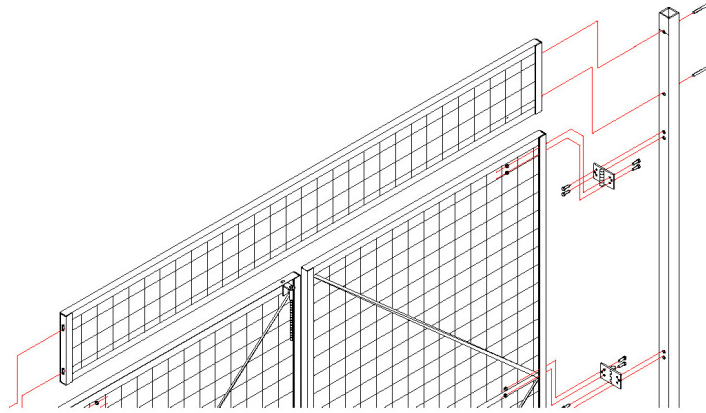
DOUBLE SWING DOOR ASSEMBLY
